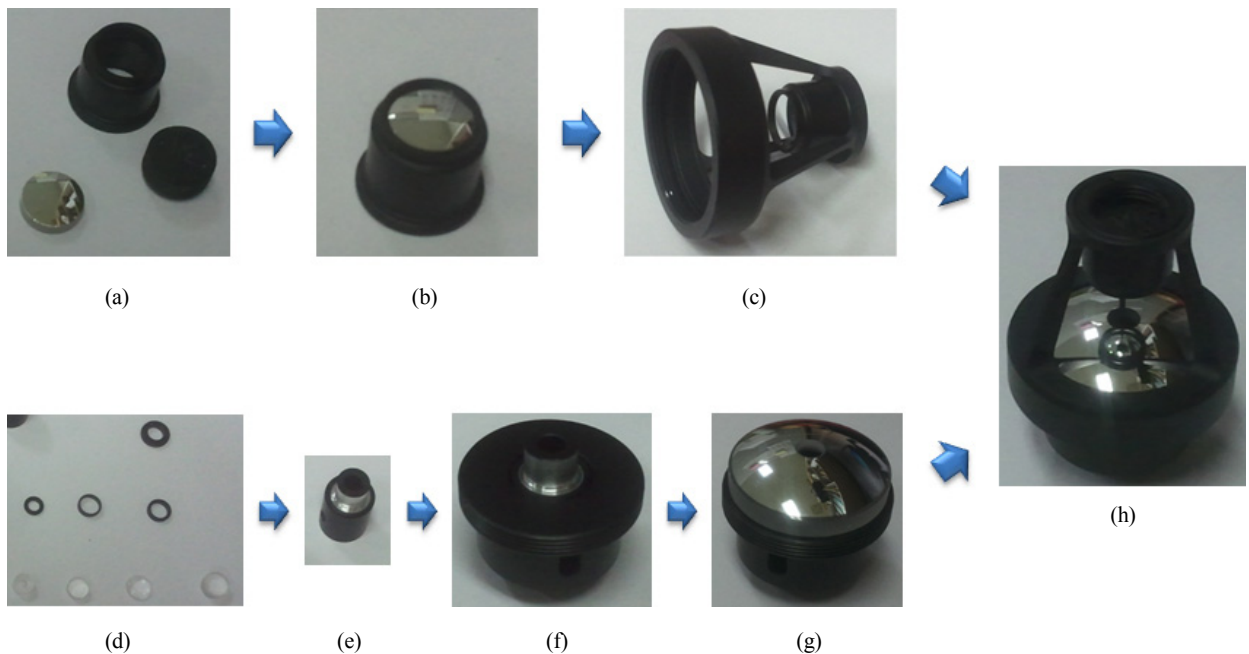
Fabricated optical elements and mechanical parts of the optimized catadioptric omnidirectional optical system and its assembling sequence diagram. (a) and (b): secondary mirror part, (c): mechanical spacer part, (d) and (e): imaging lens part, (f): CMOS sensor part, (g): primary mirror part, (h): finally assembled catadioptric omnidirectional optical system.
